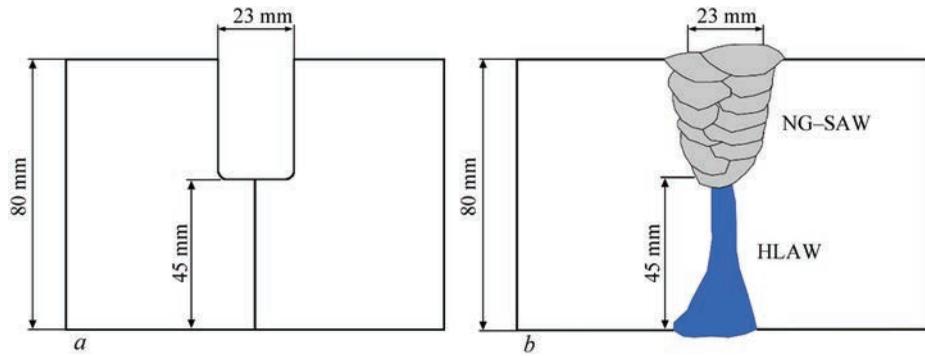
Schematic illustration of the weld joint in an 80 mm thick plate: *a* — joint preparation with U-groove and root face; *b* — weld produced by the combined HLAW and NG-SAW process
